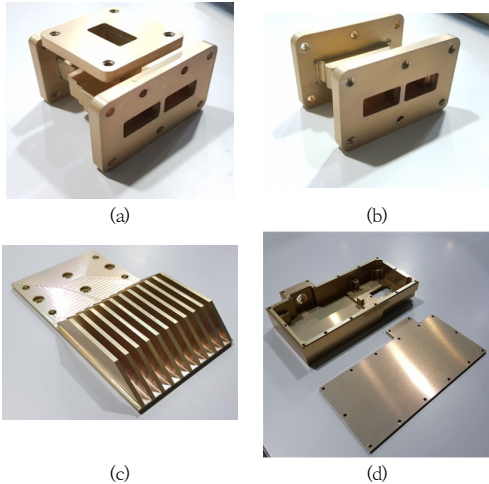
Photographs of the (a)H-Plane Folded Hybrid-Tee, (b)90° Hybrid Coupler, (c)Heat Sink, (d)Housing
